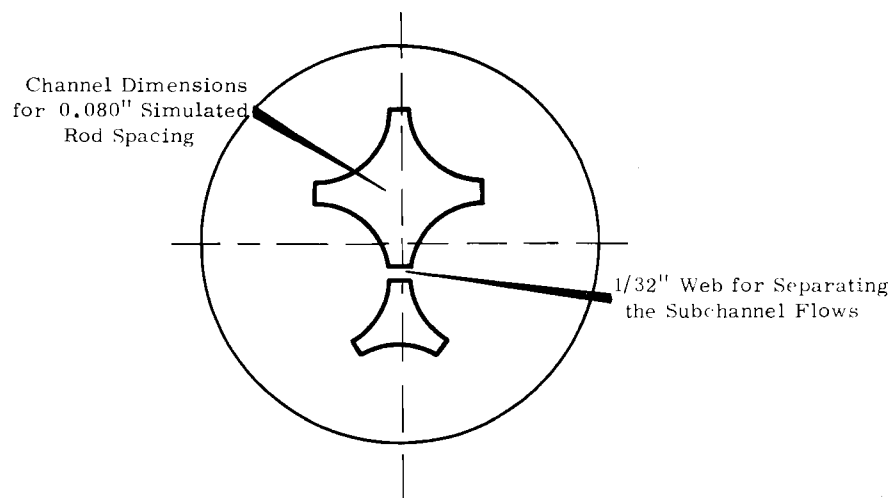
Cross Section of Inlet and Outlet Transition and Electrical Connection
